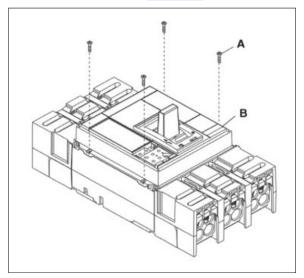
REMOVE CIRCUIT BREAKER COVER
